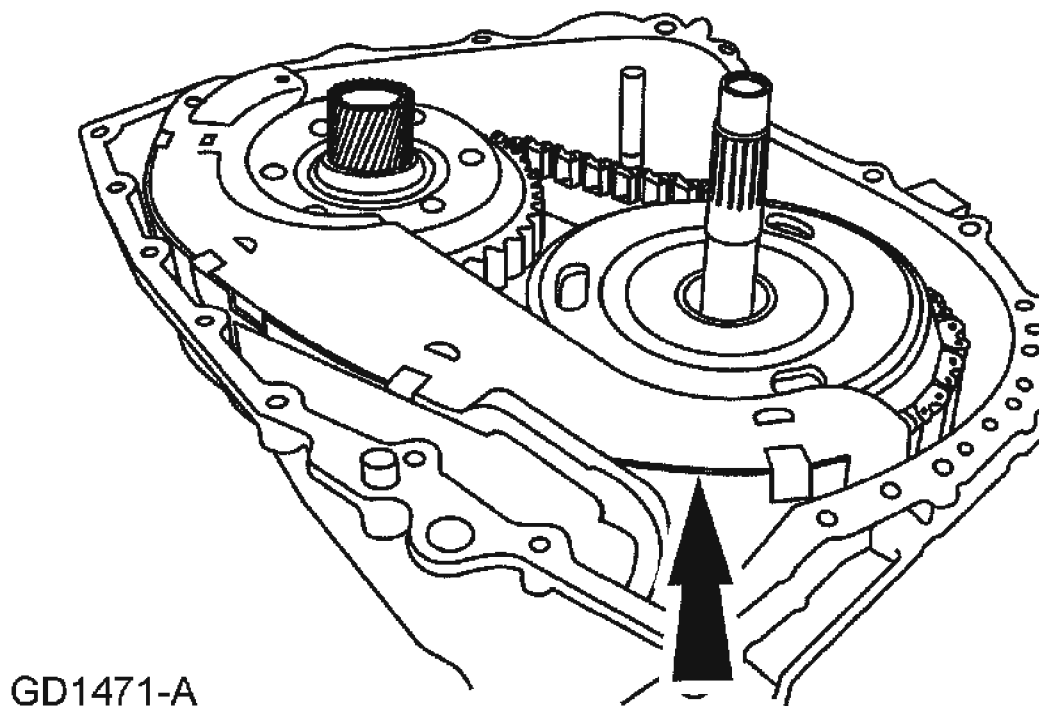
Removing Final Drive Carrier And Differential Assembly
